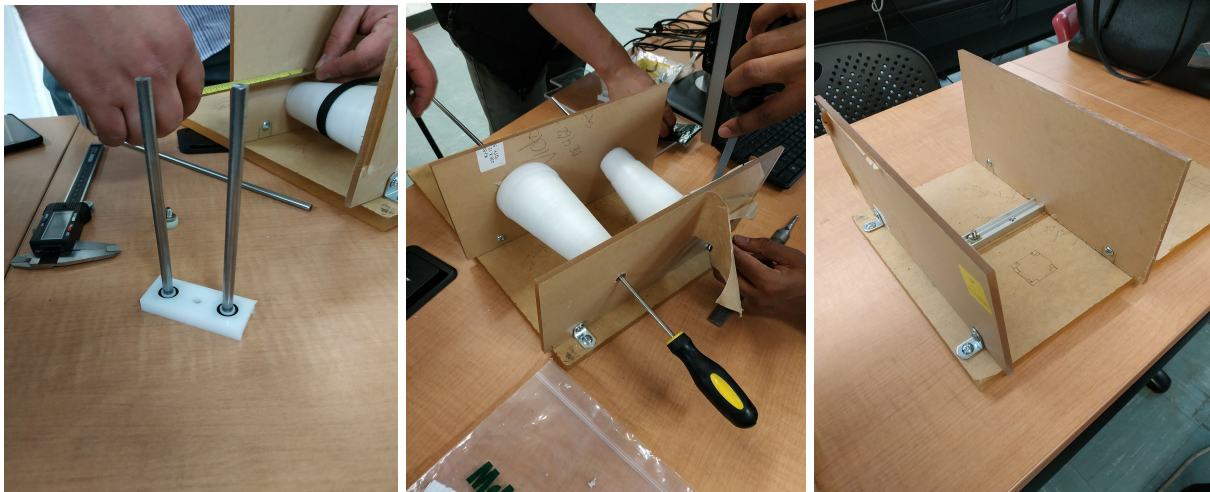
Rods inserted into the bearings connected to the housing.
